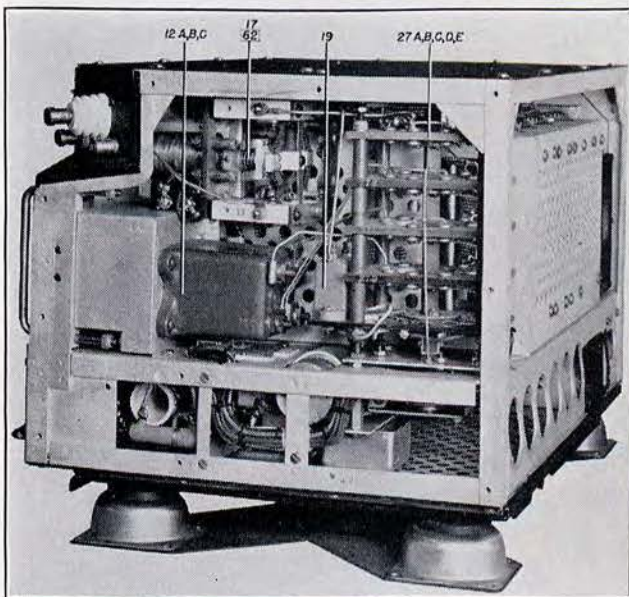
RADIO TRANSMITTER BC-338-A OR BC-353-A, RIGHT END VIEW, SHIELDS REMOVED
